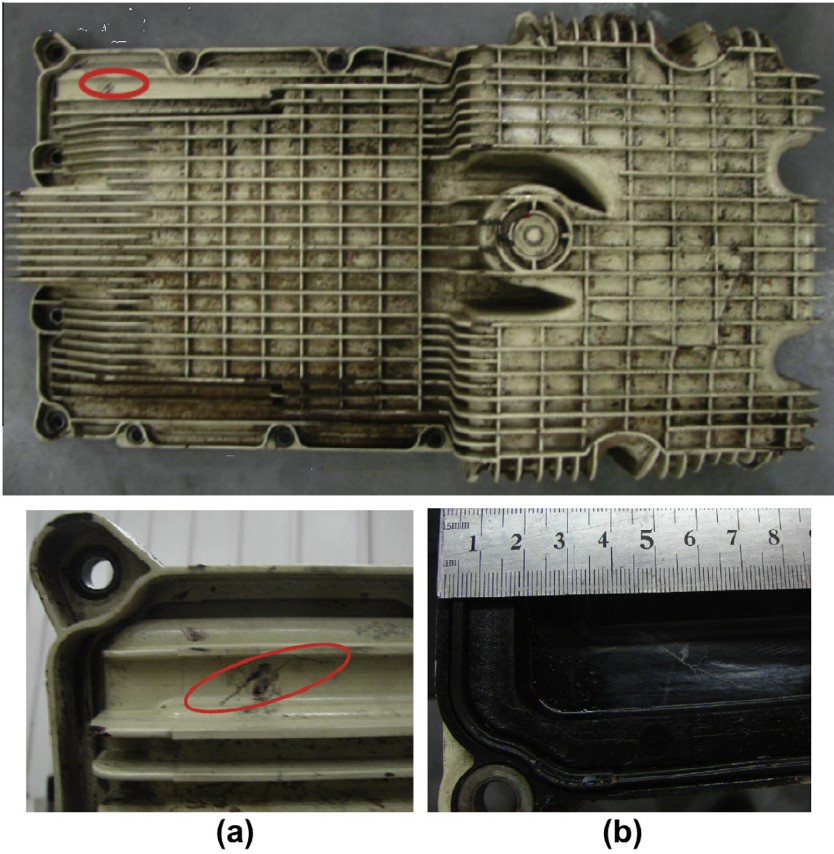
Thermoplastic oil pan crack failure, (a) outer side, and (b) inner side [2].
